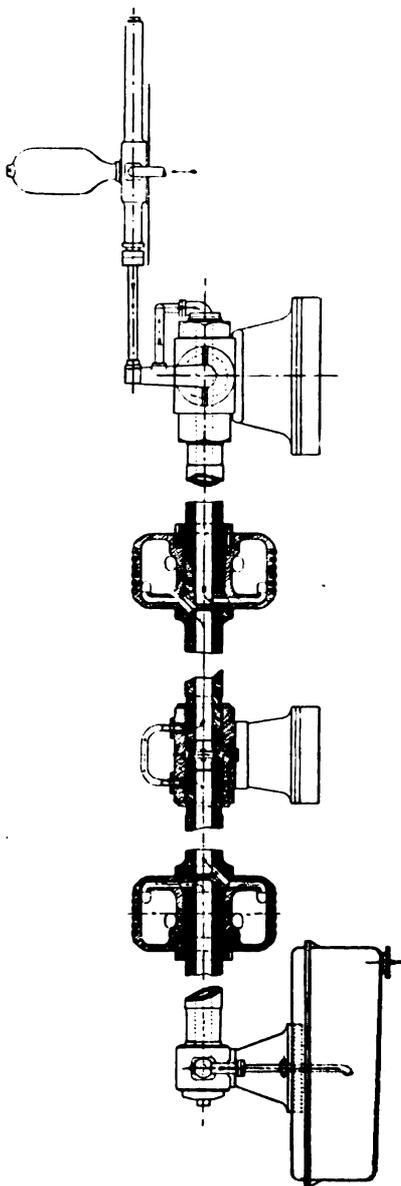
Elsassische Piston, Rod, and Crossheads.
